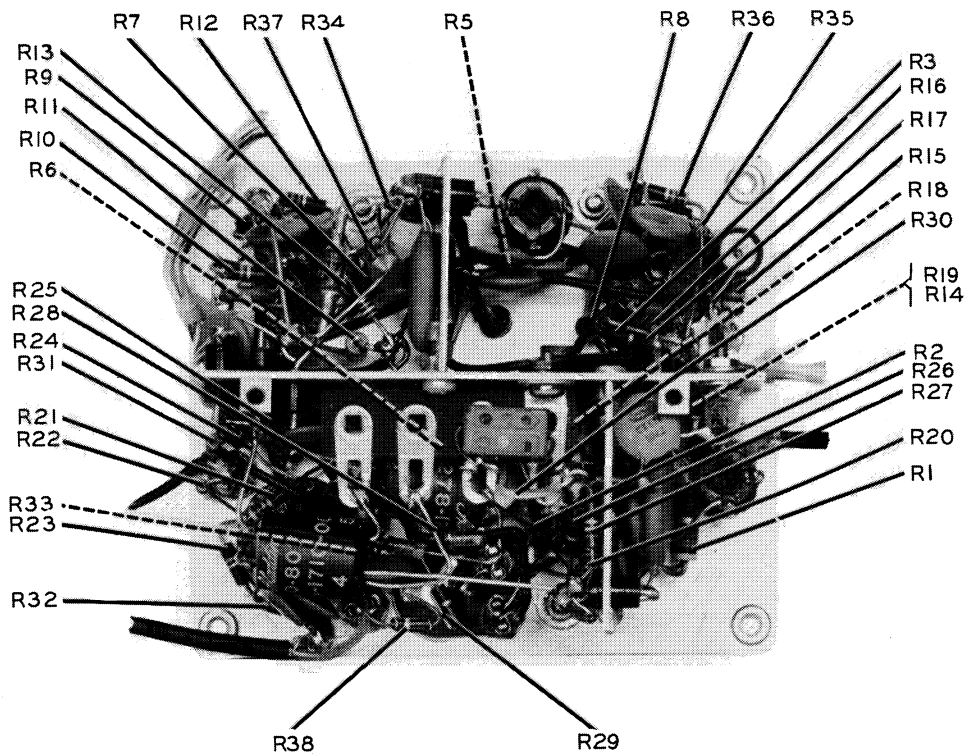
A. 136A-1 Noise Blanker, Bottom View Showing Resistor Location
